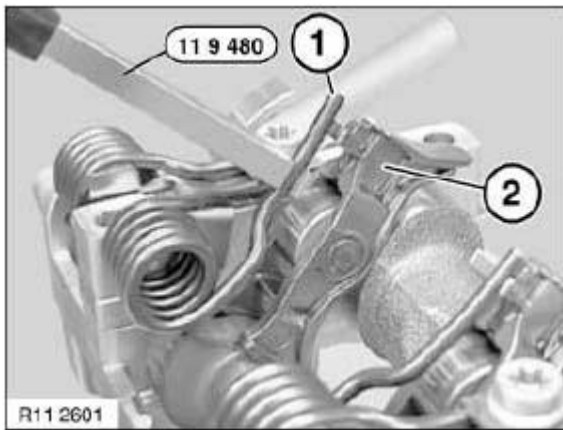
Holding Torsion Spring With Special Tool (11 9 480)
